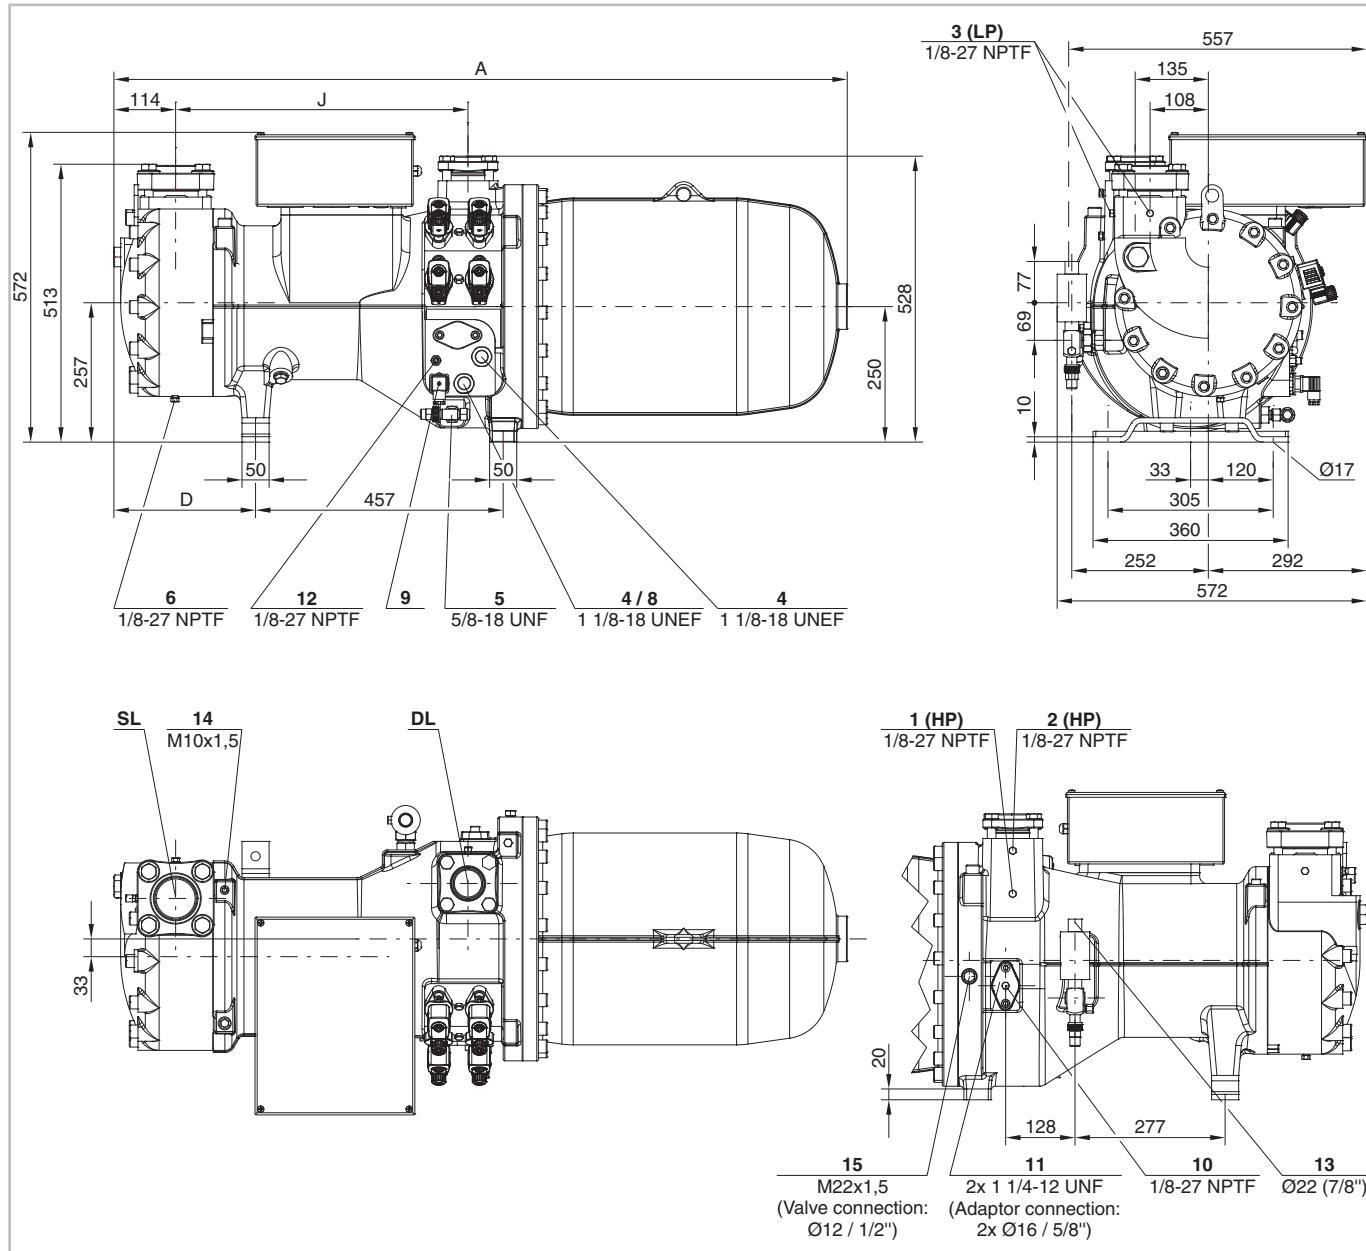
Dimensional drawing CSH7553-50Y .. CSH7593-110(Y)
